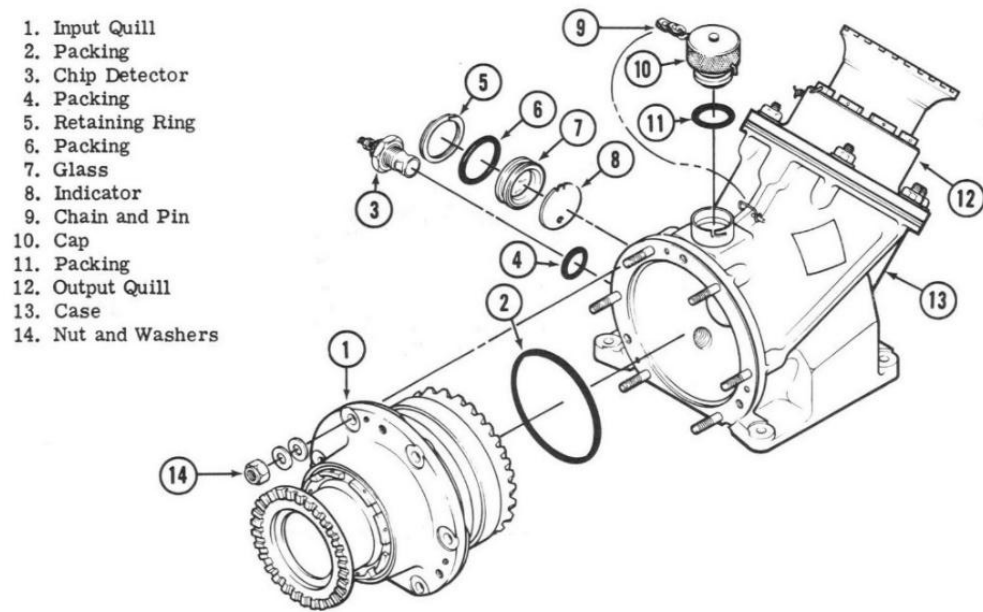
the intermediate gearbox of a Bell 205A-1 [7]
